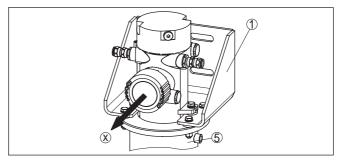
Mounting direction of the sensor towards the fastening bracket
